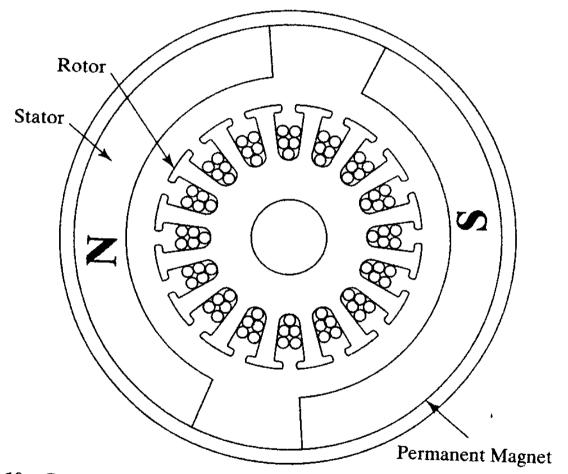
Cutaway view of a conventional permanent-magnet dc motor assembly
